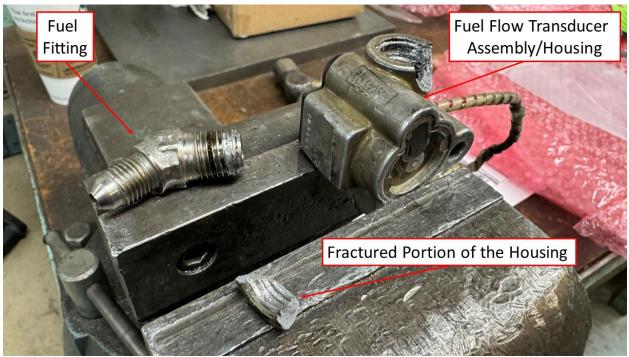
View of the fuel flow transducer, one fitting, and fractured portion of the housing.
